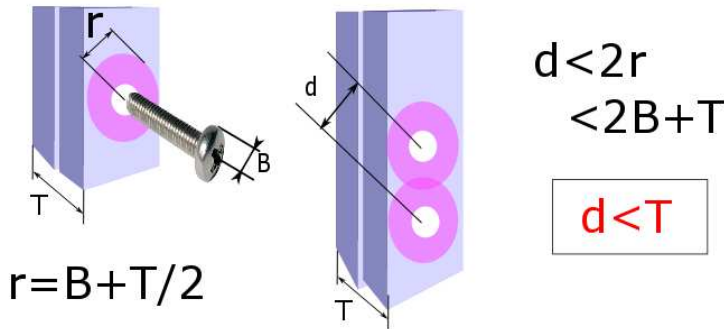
Low PIM flange design, the distance between two consecutive holes (d) must be lower than the overall thickness at the flange (T).
